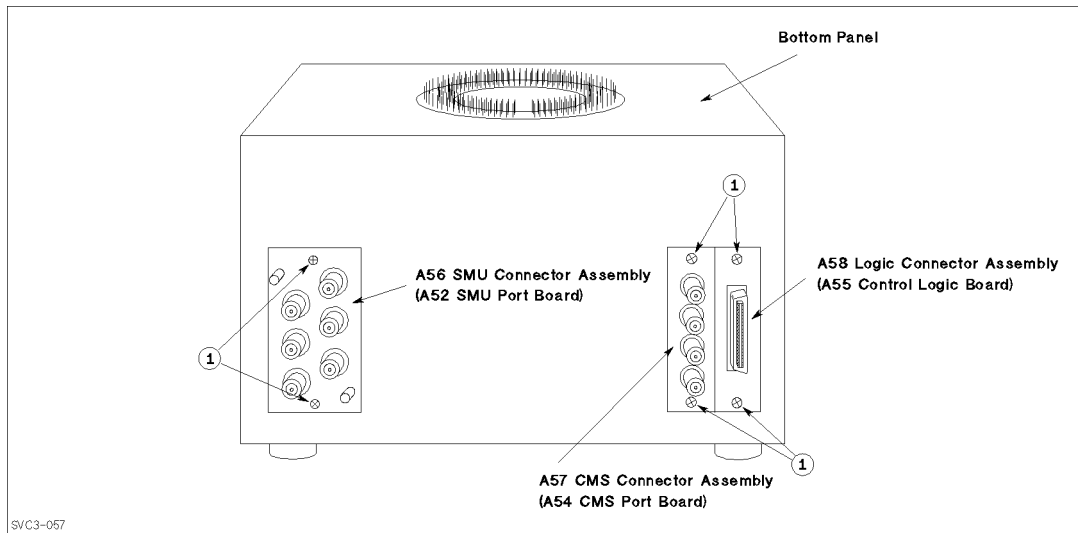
Removing Interface Boards of the HP 4085B 48-pin SWM
